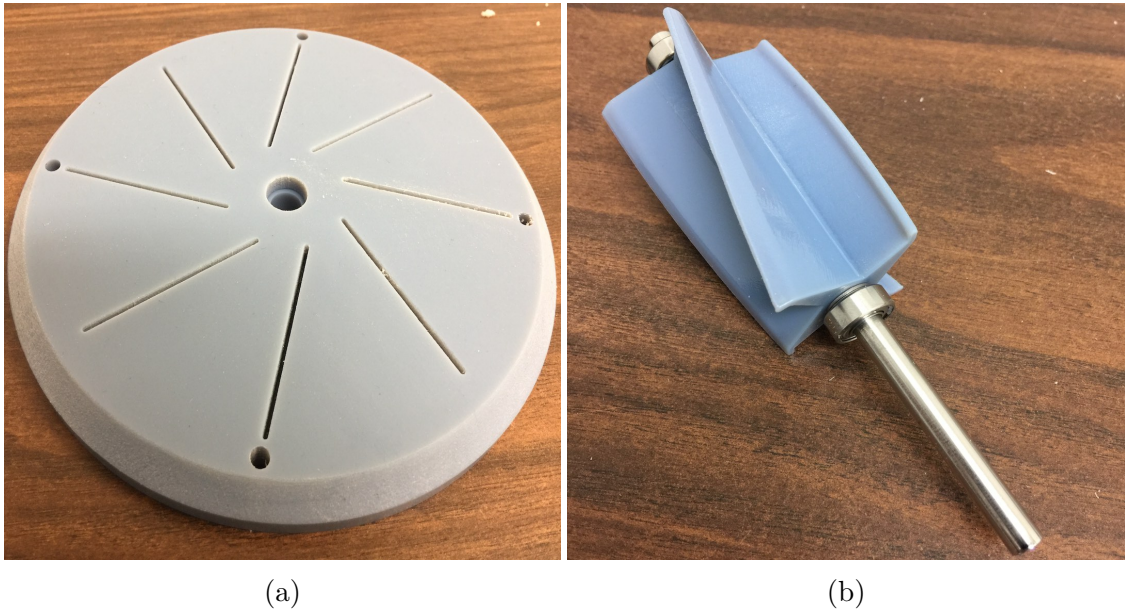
3D printed components of the 2.5-inch replica. (a) Base plate and (b) turbine assembly
